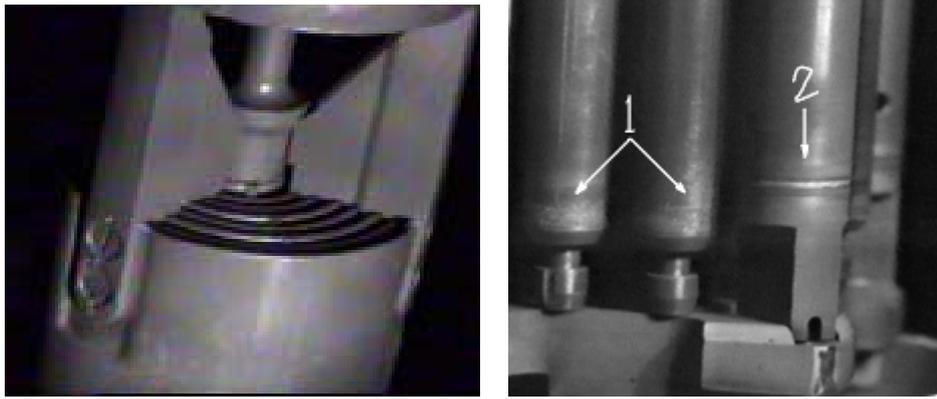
Underwater visual inspection of fuel element (left: top end of HFETR fuel element; right: bottom end of a testing PWR fuel bundle).
